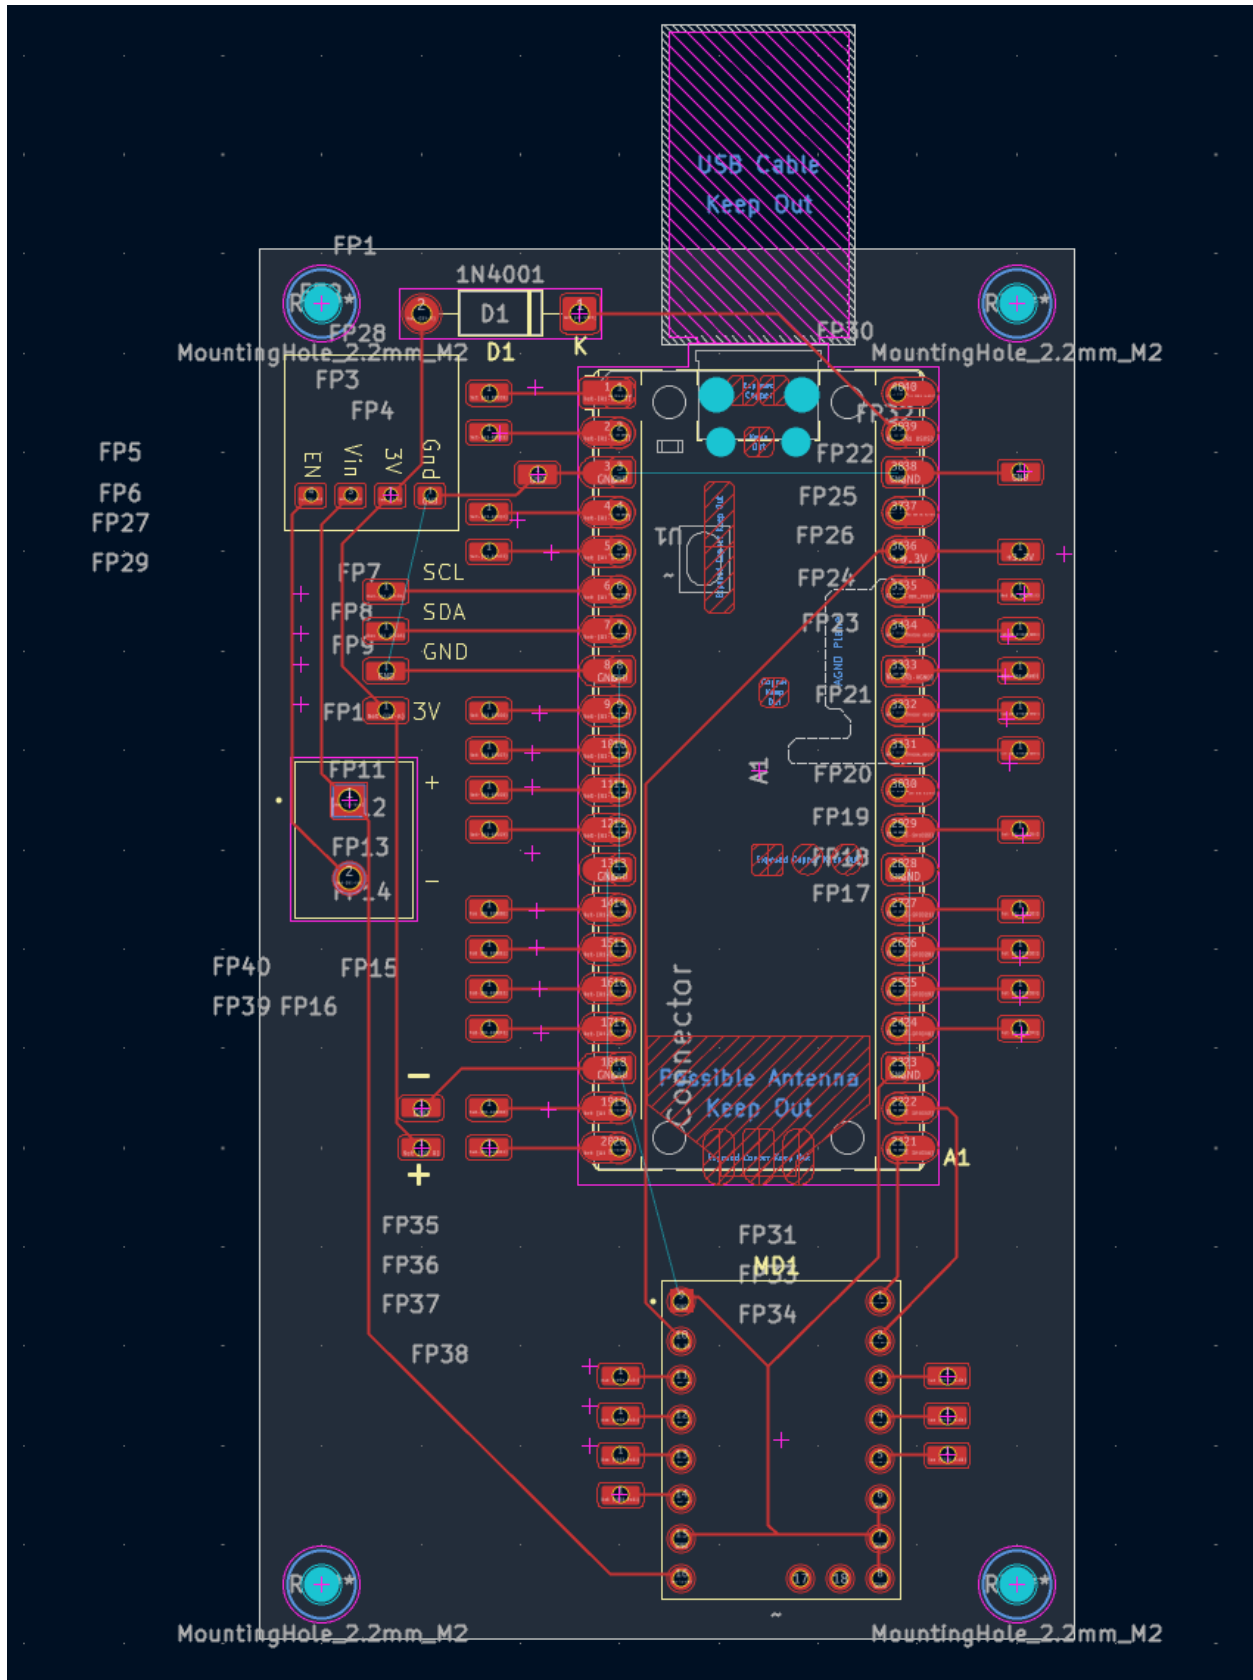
PCB Layout Component Footprint Map with FP Reference Labels
